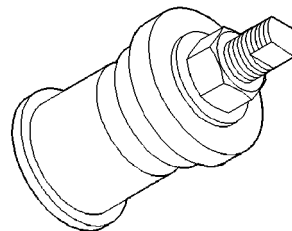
Bearing Cup Installation Special Tool - 5050A
